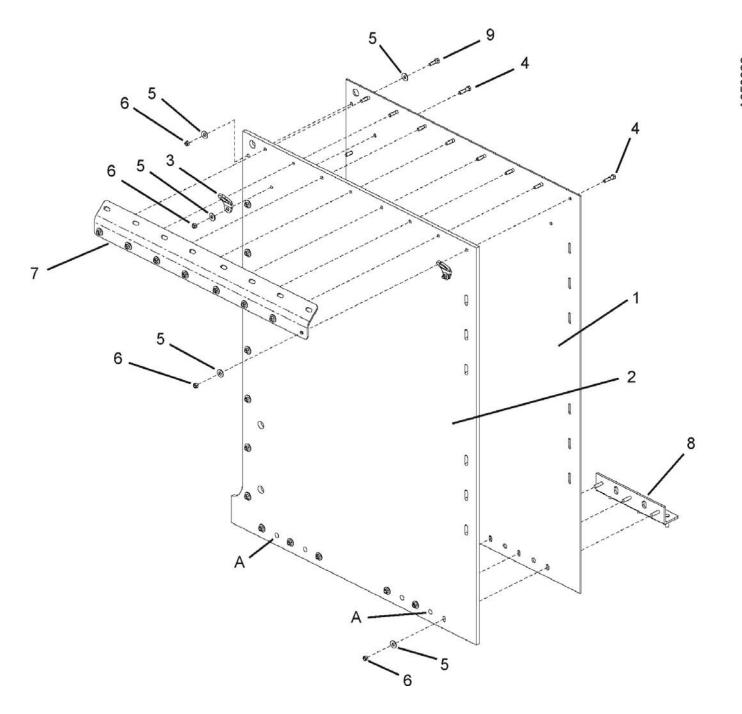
Left Aft Side Panels Pre-Assembly.
